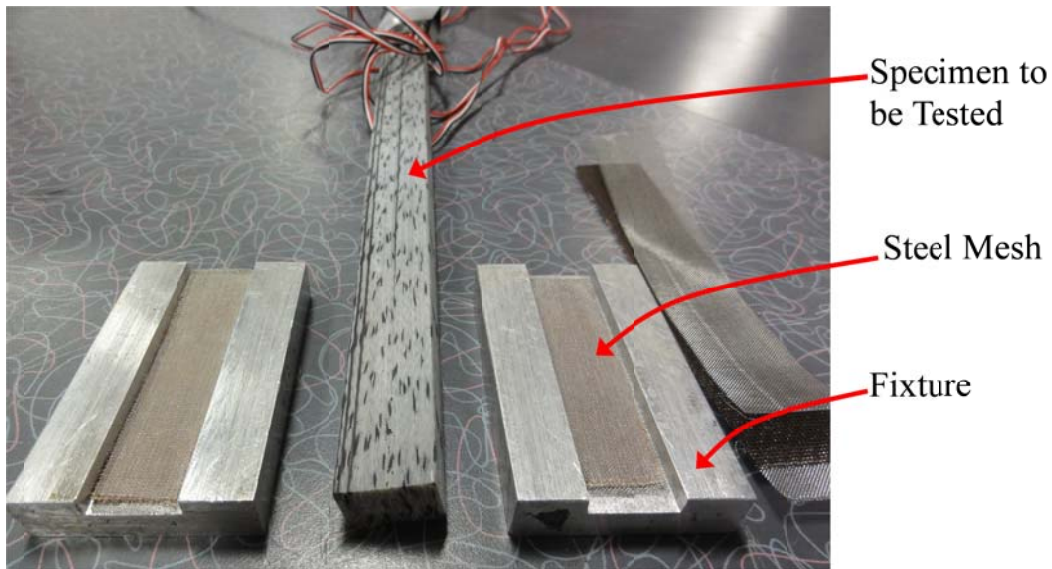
Steel Fixtures and Steel Mesh Used to Prevent Crushing and Slipping
